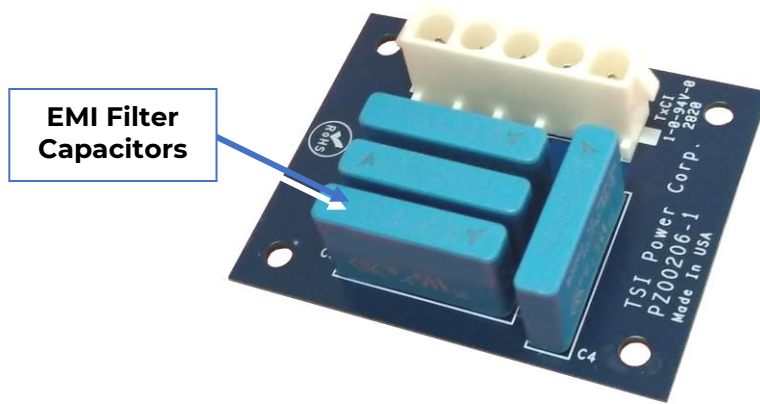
PZ00206 EMI Filter Circuit Board Assembly
